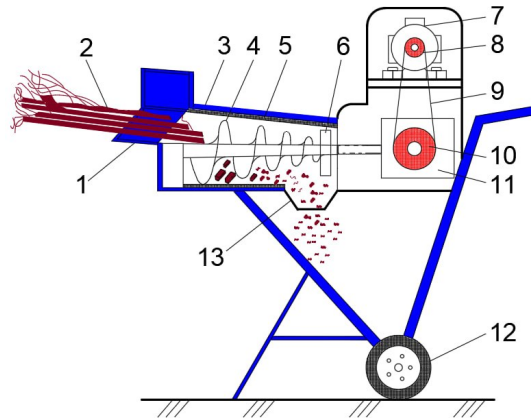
Scheme of the device for shredding bushy tree branches: 1- transmission line; 2-horn; 3- grinding device housing; 4-grinding auger; 5-internal cutting board; 6-spade; 7- electric motor; 8,10 pulley; 9-belt transmission; 11- reducer; 12- wheel; 13- product output line.
